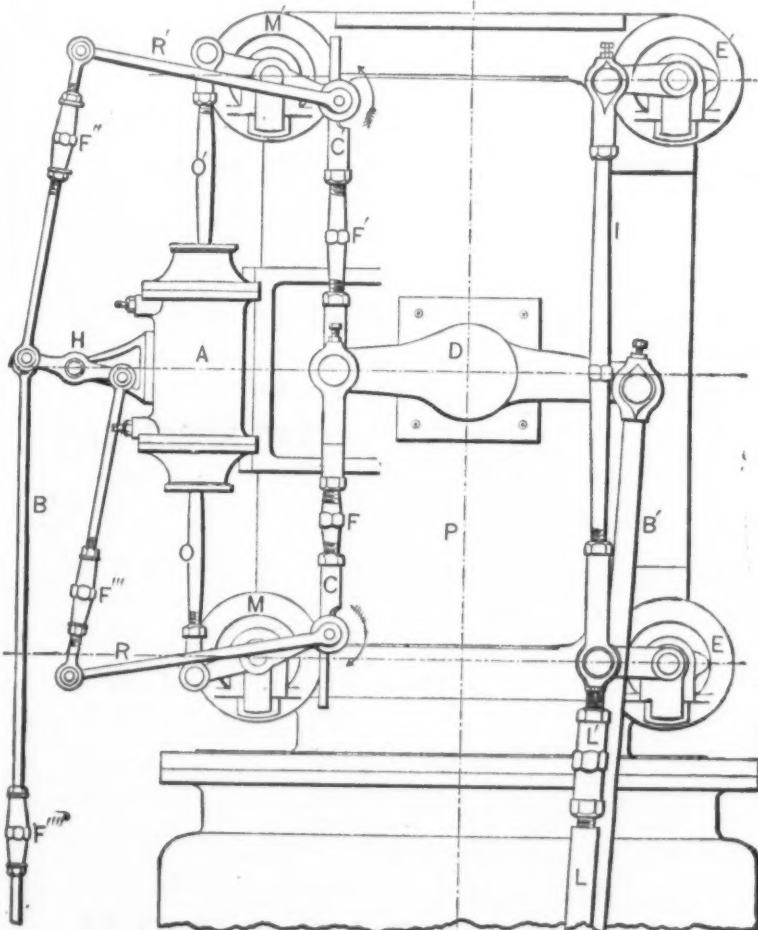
The High-Pressure Cylinder and Valve Gear.
